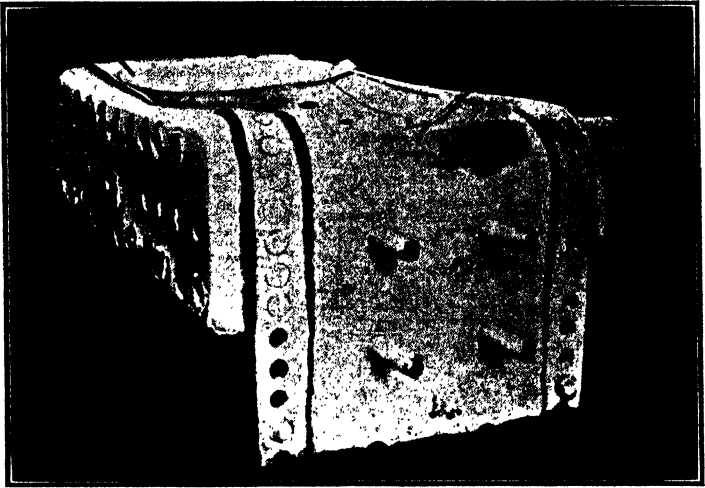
REPAIR RECENTLY CARRIED OUT ON THE TYNE. Fractured and collapsed main boiler combustion chamber top cut out, renewed, and electrically welded into position.
